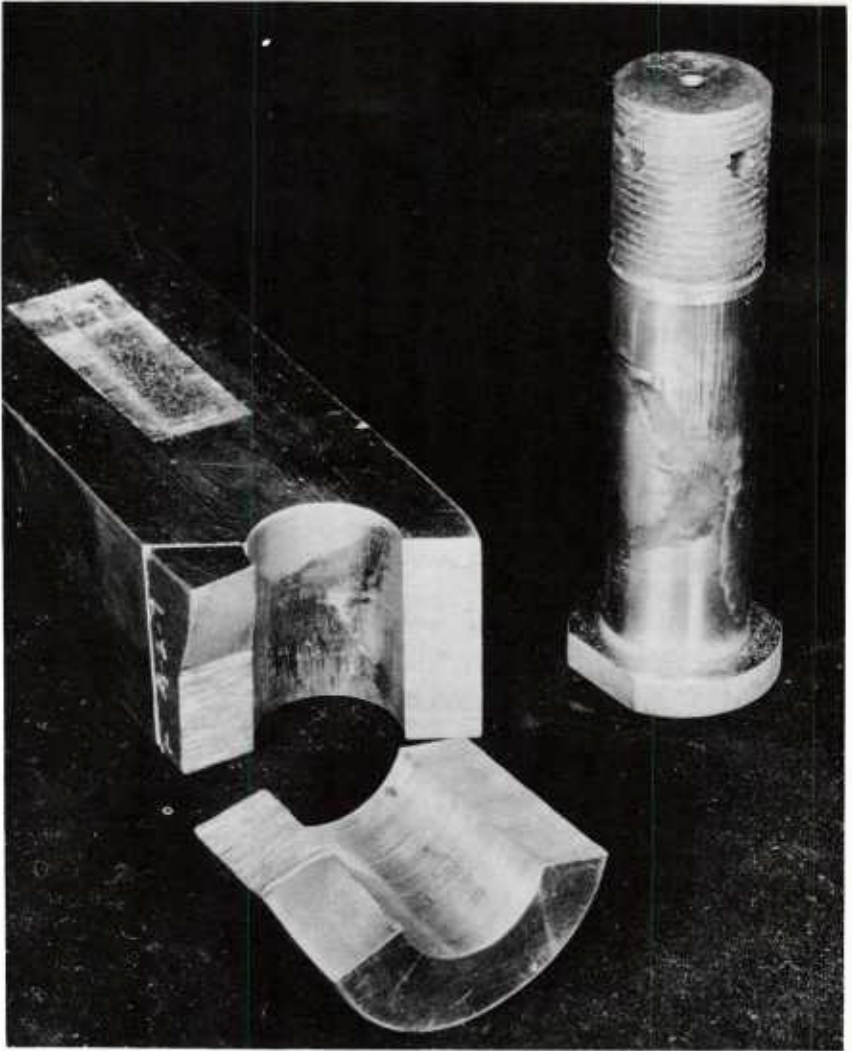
Failure in a pin joint.⁽⁶⁾
